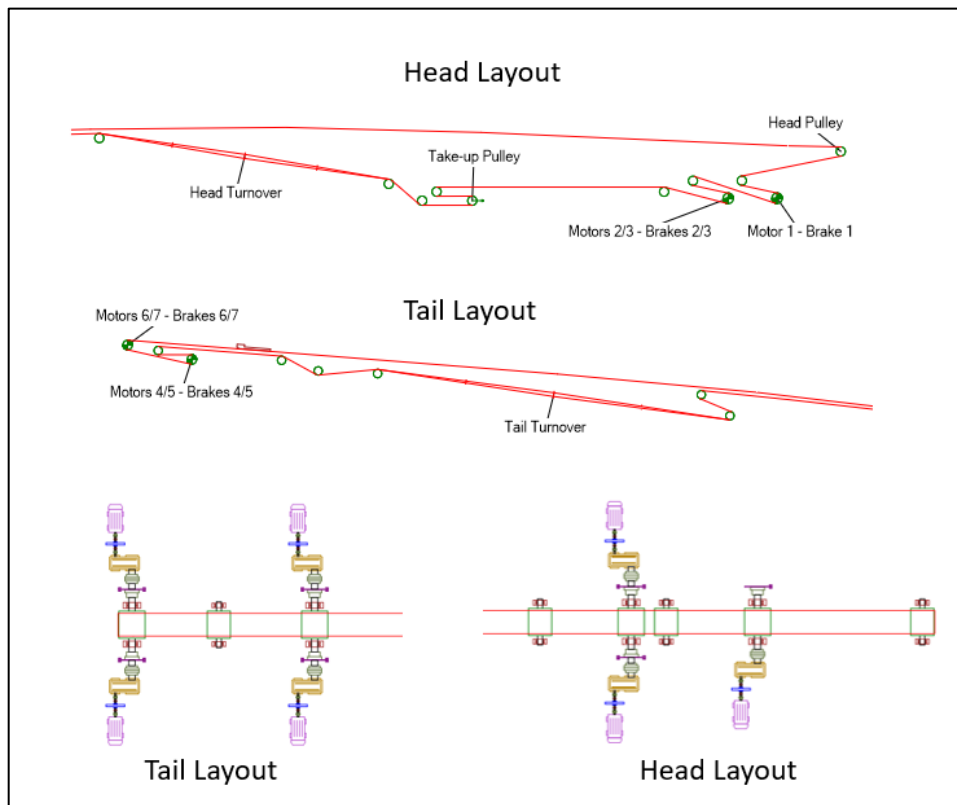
Head and tail drive layout for conveyor TR-2011KS-07.
